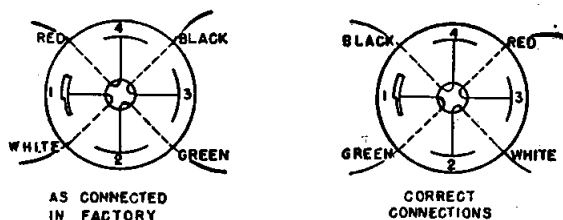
Connections to cable plug P-403 in Model NMC equipment.
